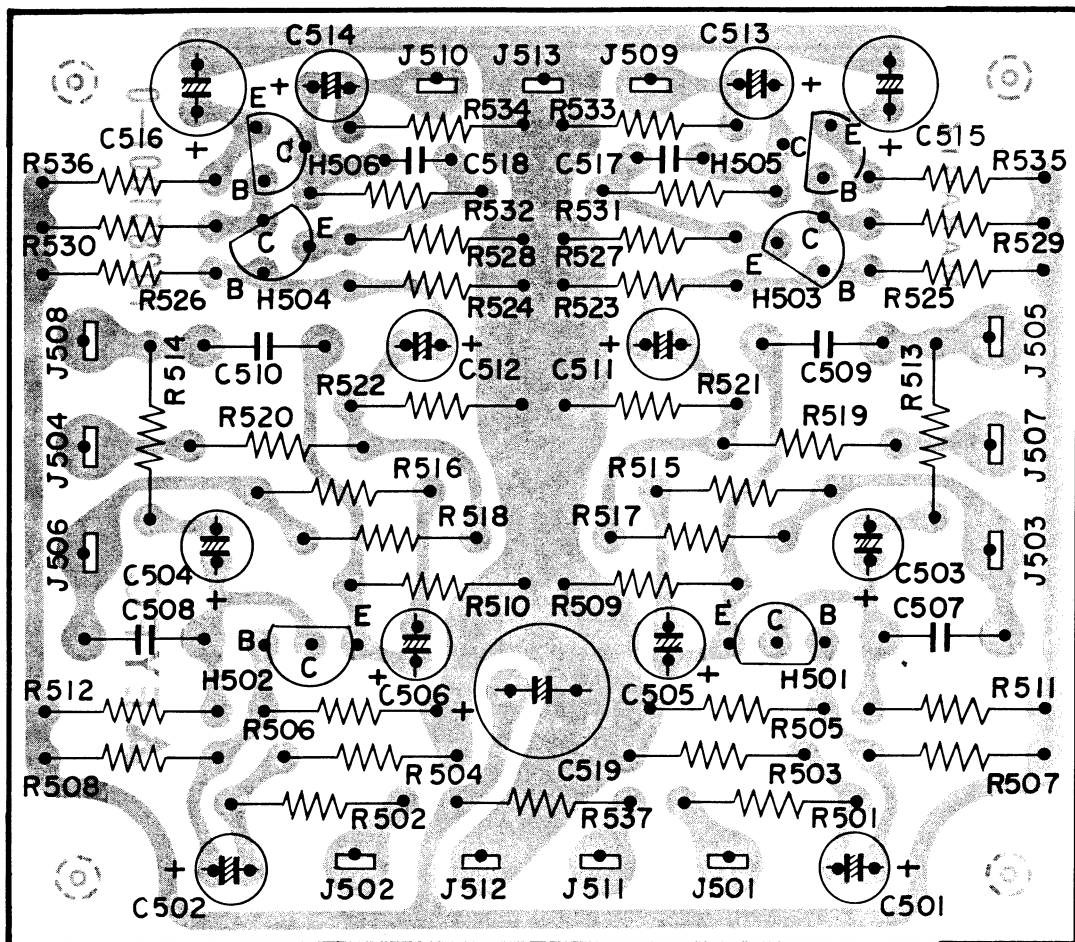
Vari-Matrix Unit Assembly P500 Component Location
